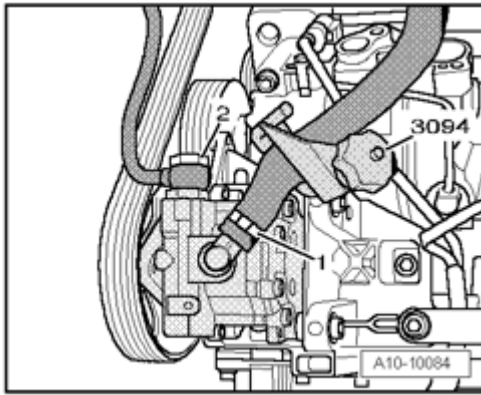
Identifying Hydraulic Hose, Hydraulic Pressure Line & Hose Clamps 3094
